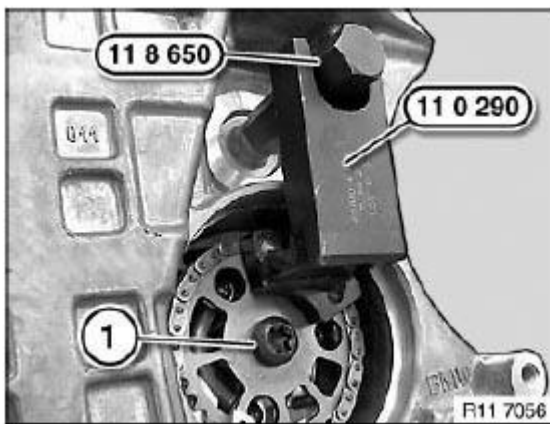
Positioning Special Tool 11 0 290 On Sprocket Wheel And On Special Tool 11 8 650
